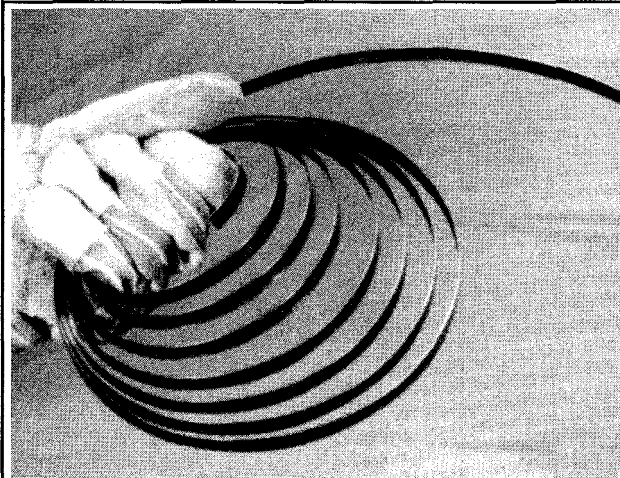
Inspect the spring for wear, damage or corrosion handle with care
